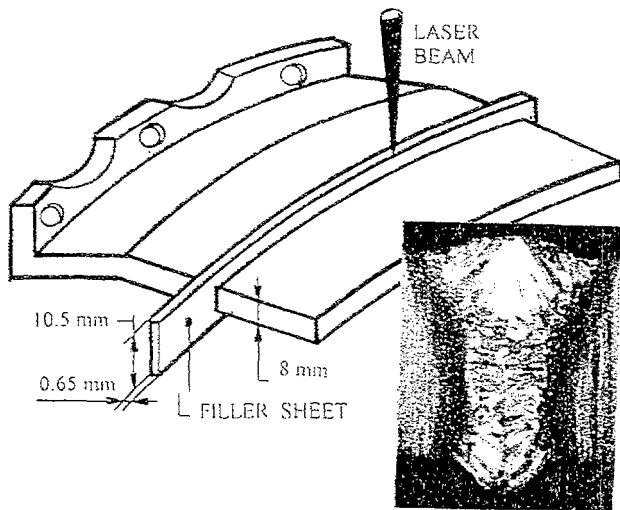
Low-pressure turbine housing made of Ti6Al4V. Cutting and rewelding using a CO₂ laser for parts maintenance.
